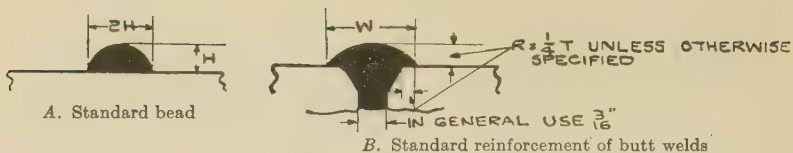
Standard bead and reinforcement of butt welds.
